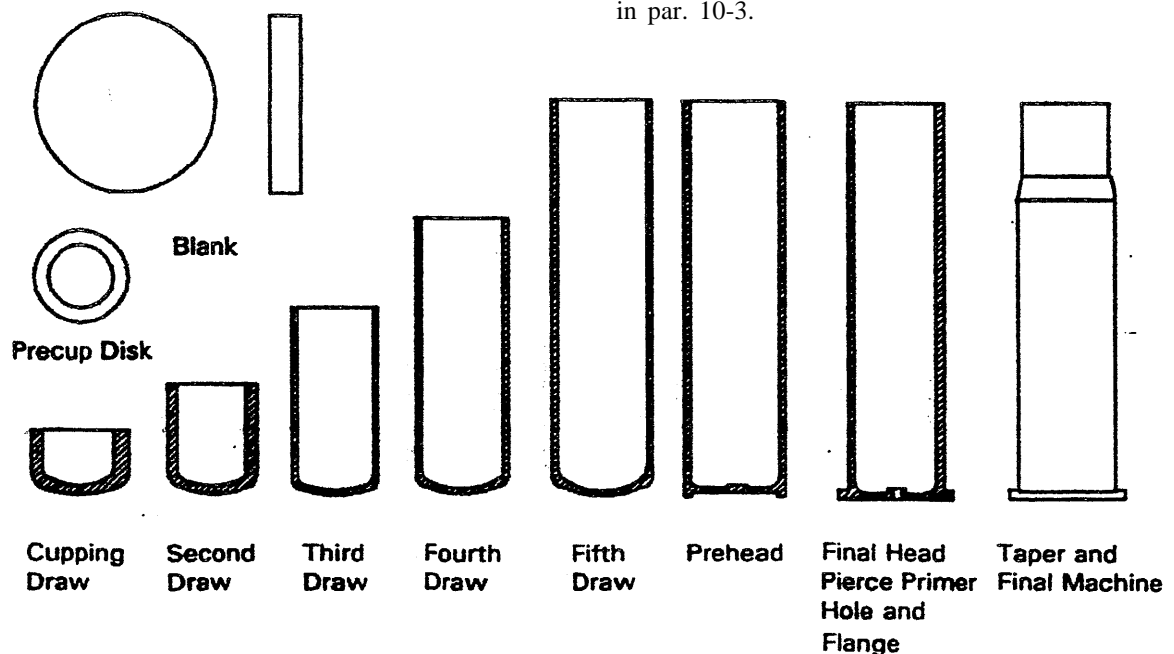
Progressive Drawing, Forming, and Machineing Operations
